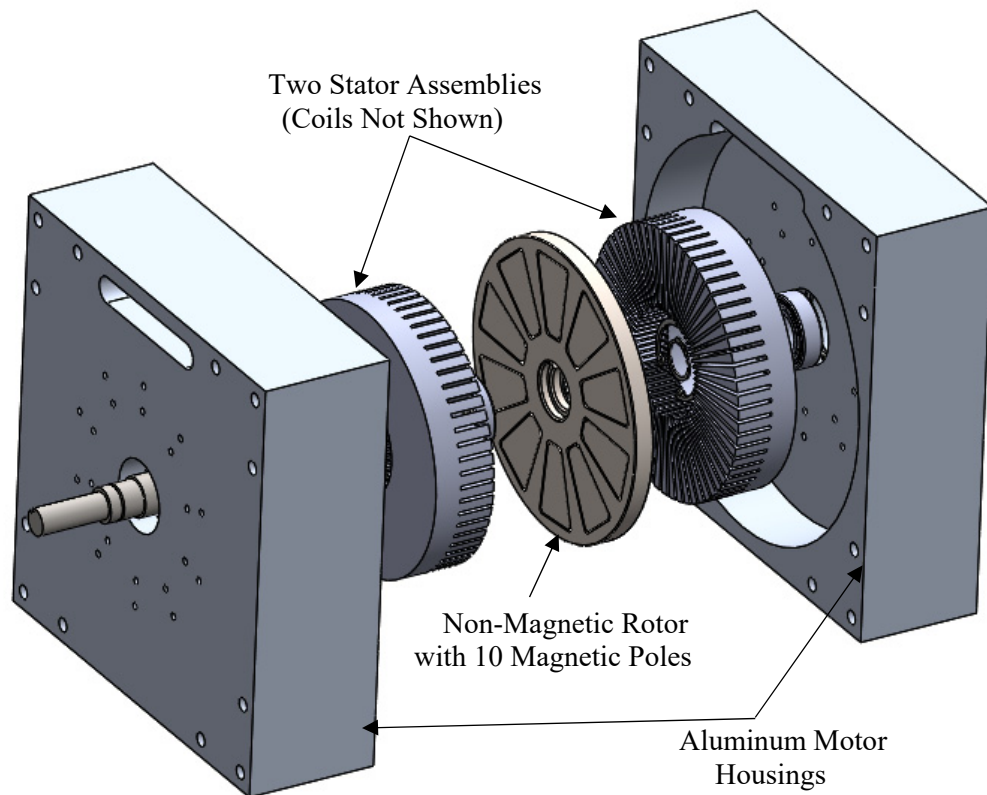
Exploded View of 60-Slot, 10-Pole SRDS AFPM
